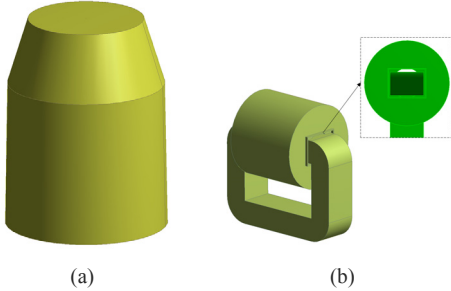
(a) an epoxy mold and (b) a core of the molded dry-type transformer
